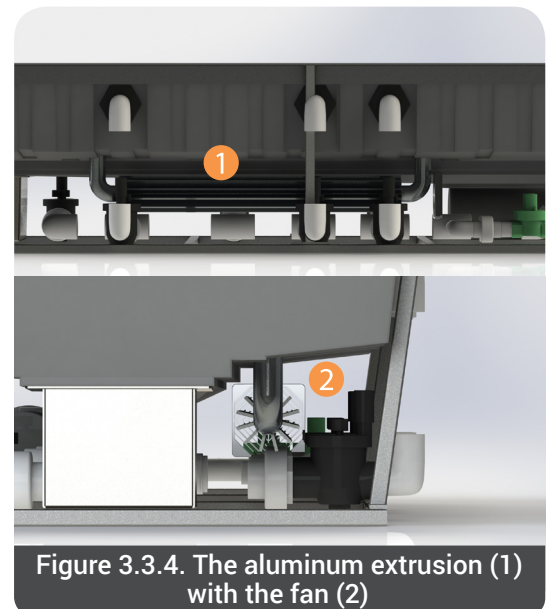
The aluminum extrusion (1) with the fan (2)
